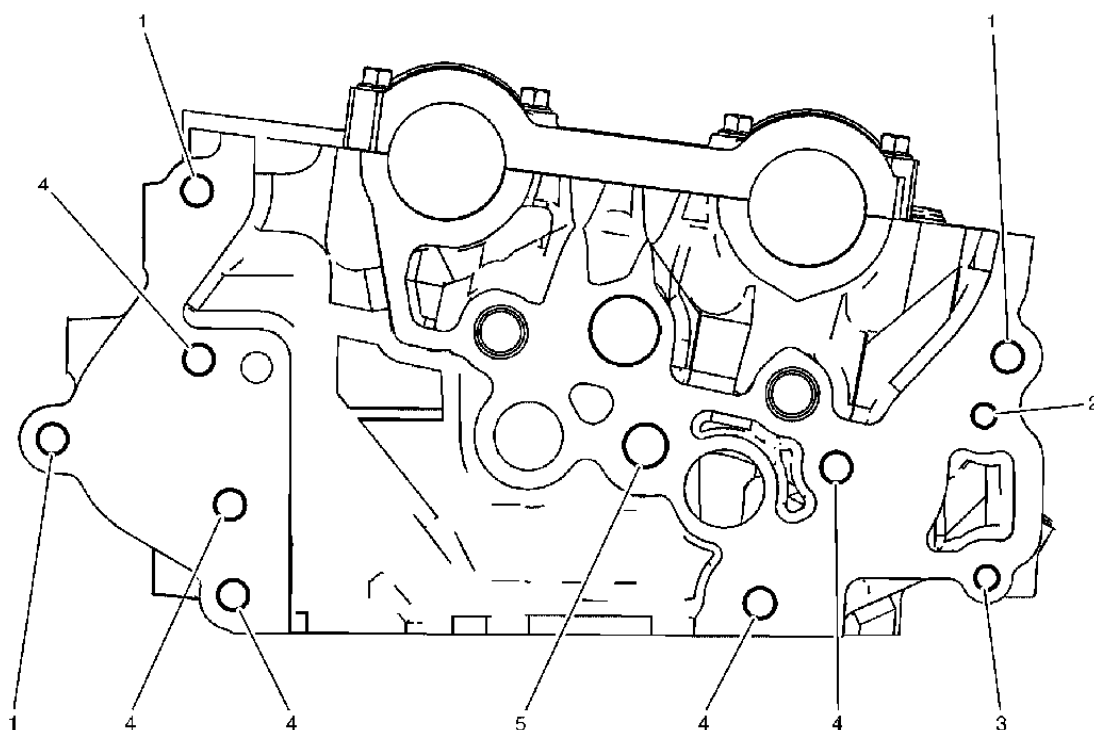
Identifying Right Cylinder Head Camshaft Cover Face
